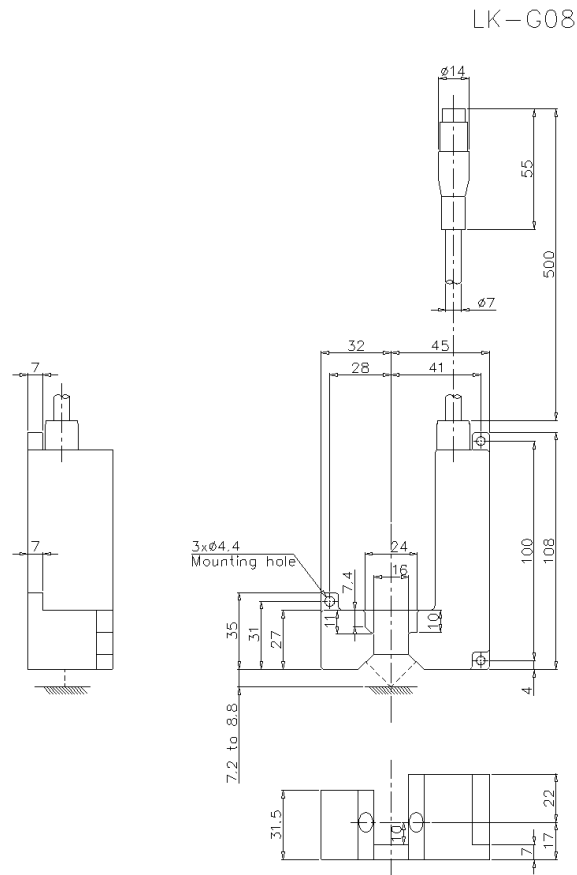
CAD drawing of Keyence LK-G08 laser head (Keyence, 2015)
